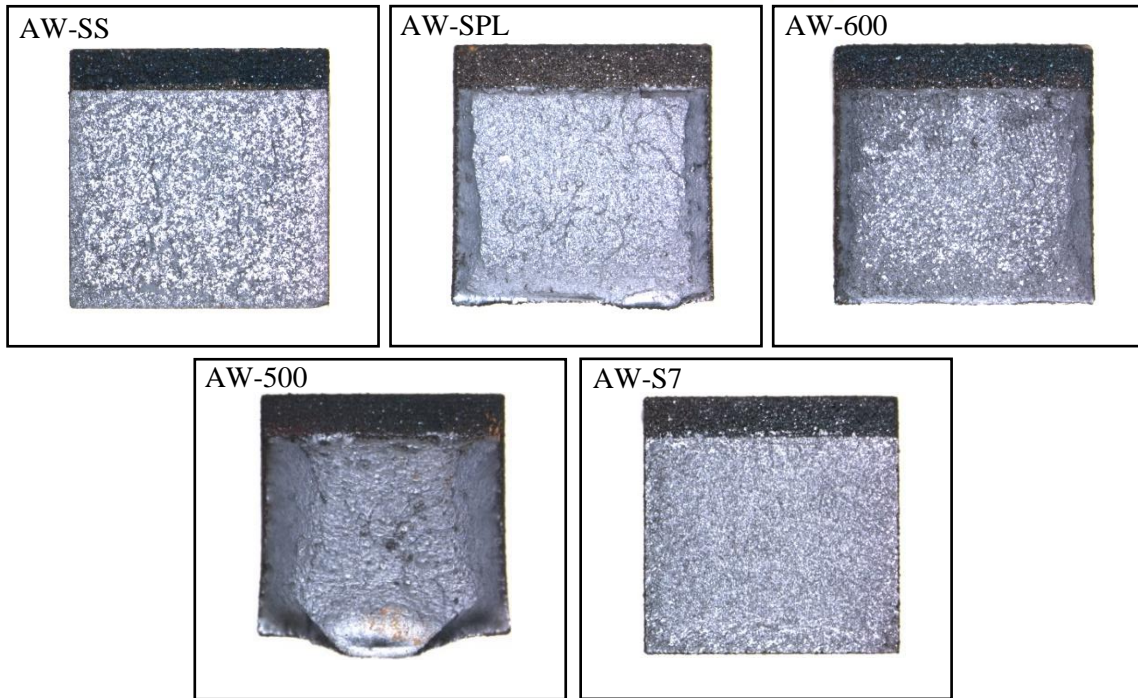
Impact bar fracture surfaces with cycle 1 heat treatment (593°C, air cool).
